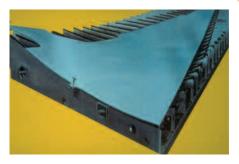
Checking Fixture for Verifying Peen Forming of Wingskin
